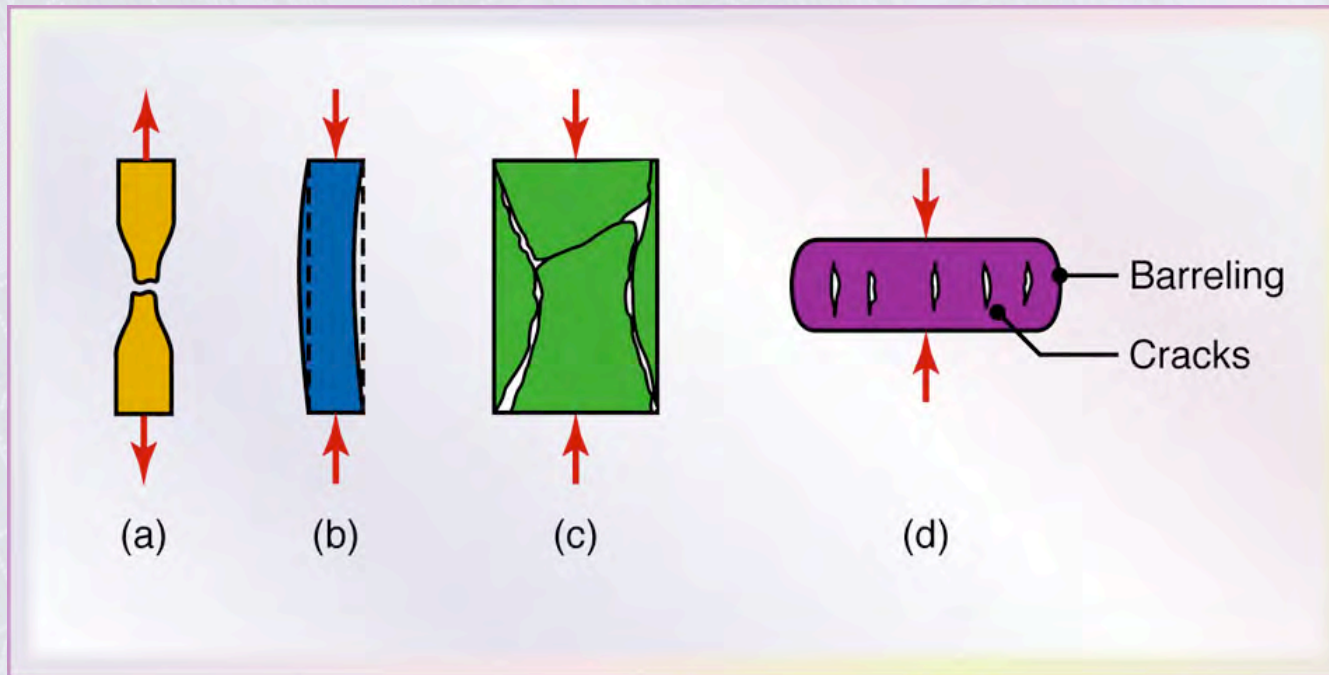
Schematic illustrations of types of failures in materials: (a) necking and fracture of ductile materials; (b) buckling of ductile materials under a compressive load; (c) fracture of brittle materials in compression; (d) cracking on the barreled surface of ductile materials in compression
